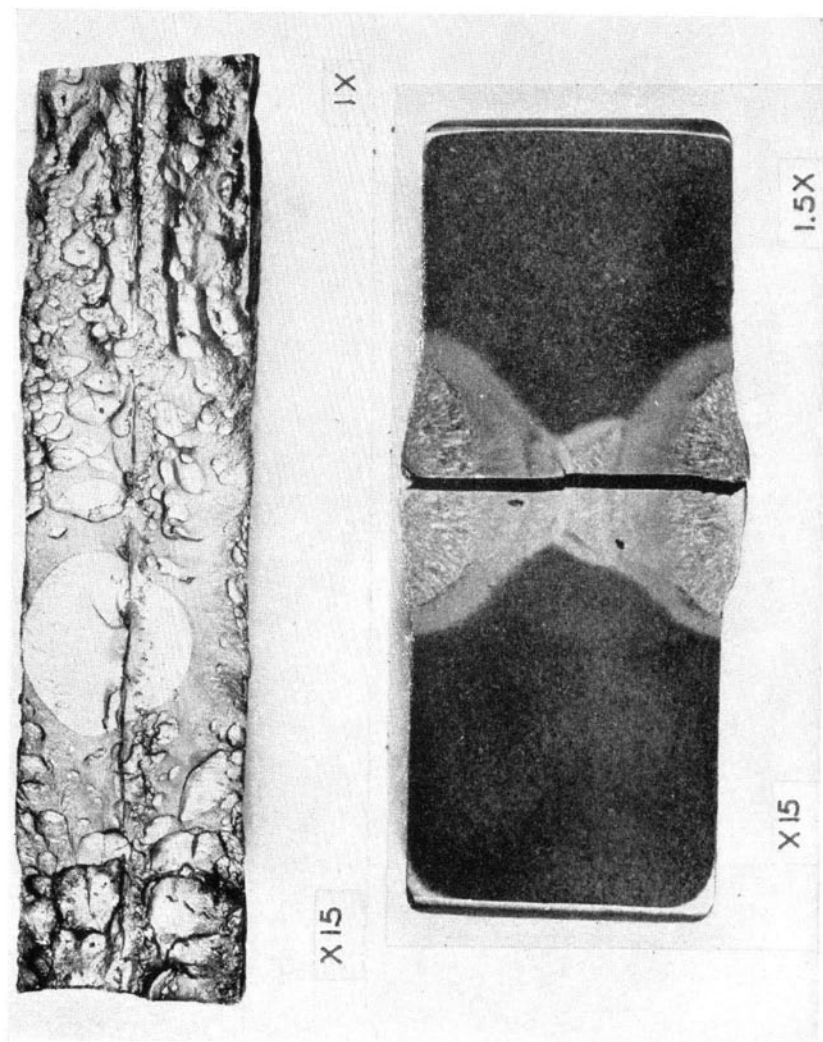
MACROGRAPHS AND FRACTURE SURFACE OF SPECIMEN X15 SHOWING EFFECT OF LACK OF ROOT PENETRATION ON FATIGUE FAILURE
